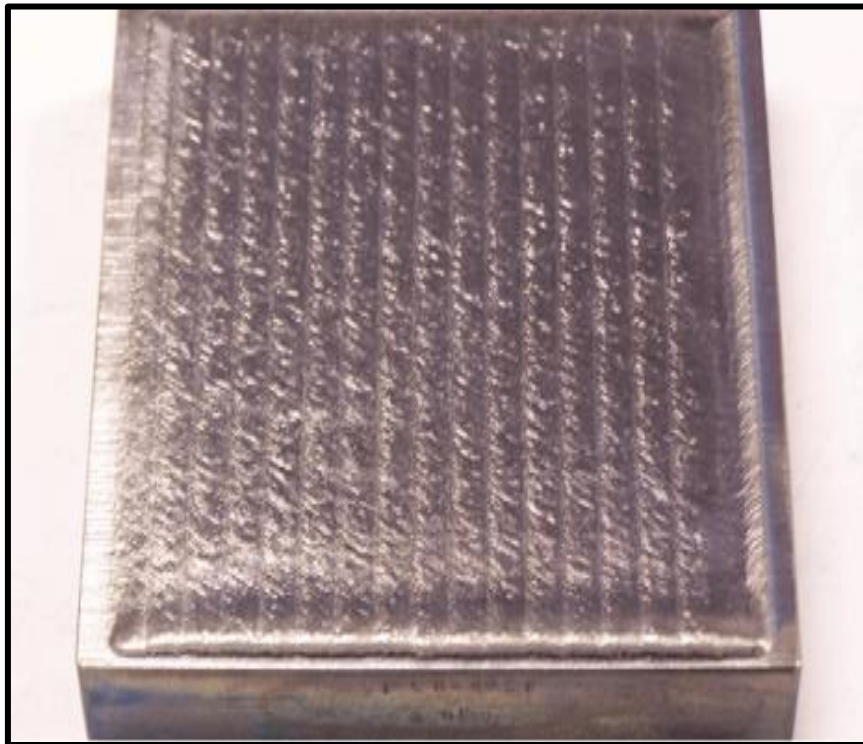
Weld overlay of the filler material on the substrate.
